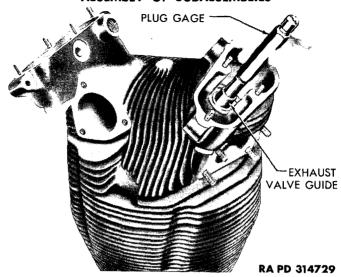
Measuring Valve Guide Using Gage 41-G-254-285
